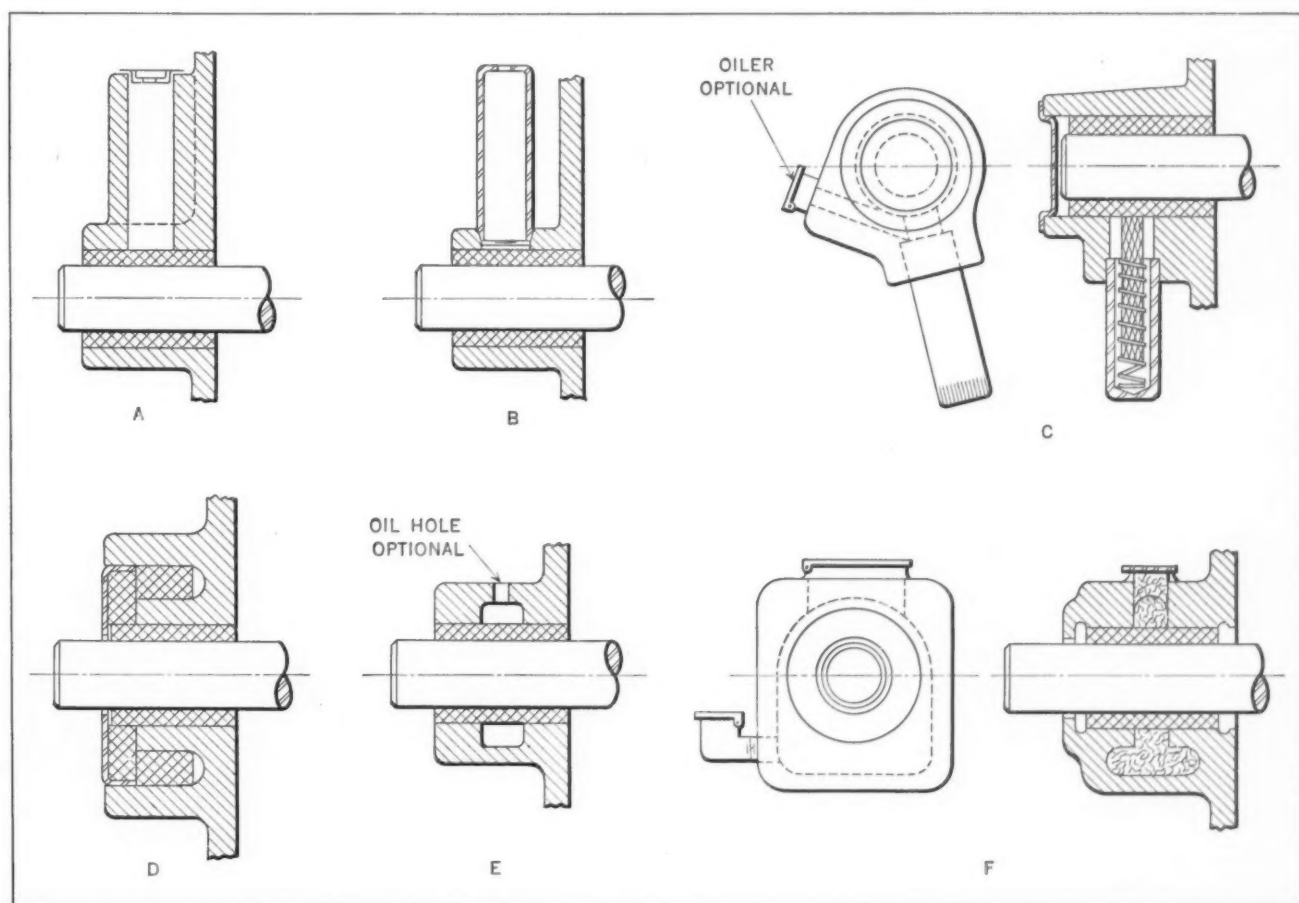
Applications of Porous Bronze Bearing Bushings, Showing Methods of Providing Oil Reservoirs
